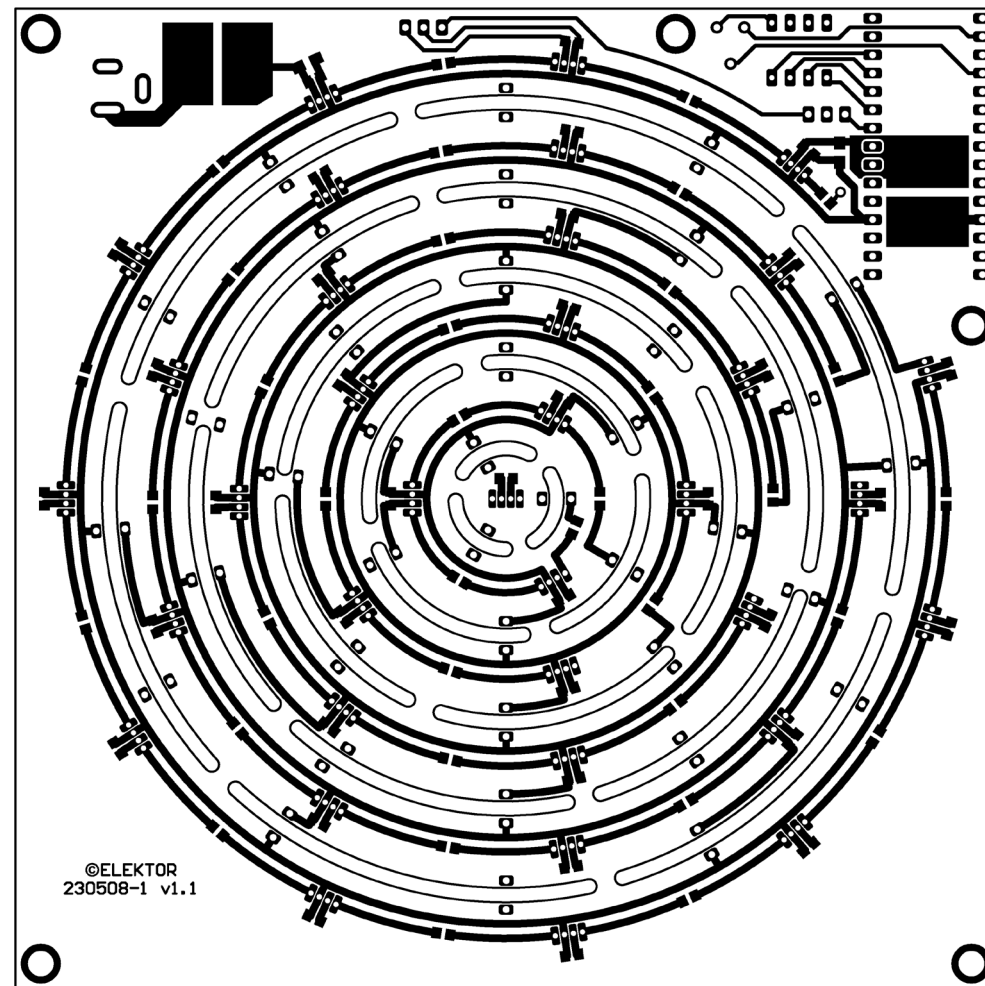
Copper layout, PCB bottom side, Circular Christmas Tree. 2023. PCB no. 230508-1 v1.1.
